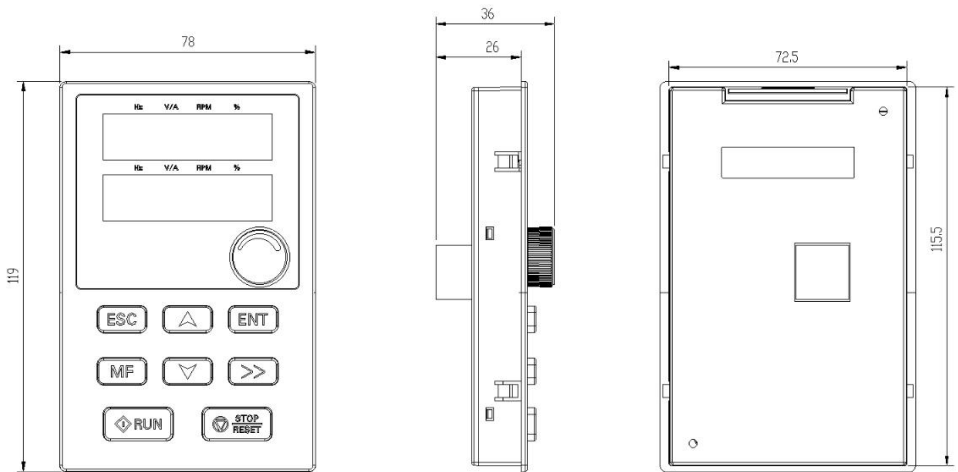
Appearance and dimensions of a keypad of 22kW above (unit: mm)
